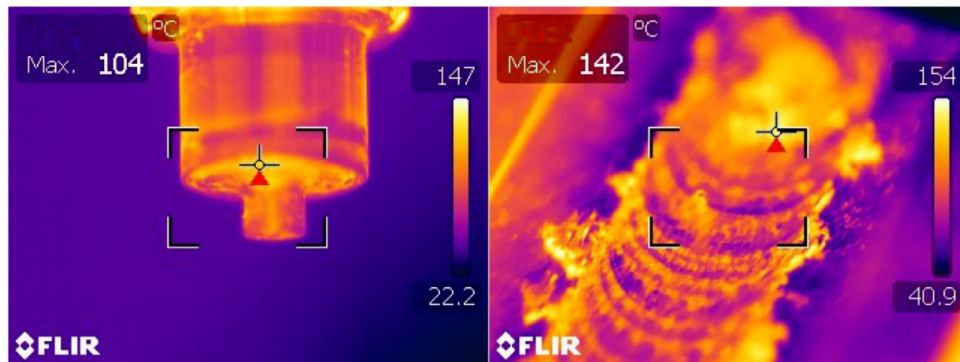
Thermal camera images of the tool and workpiece immediately after welding
